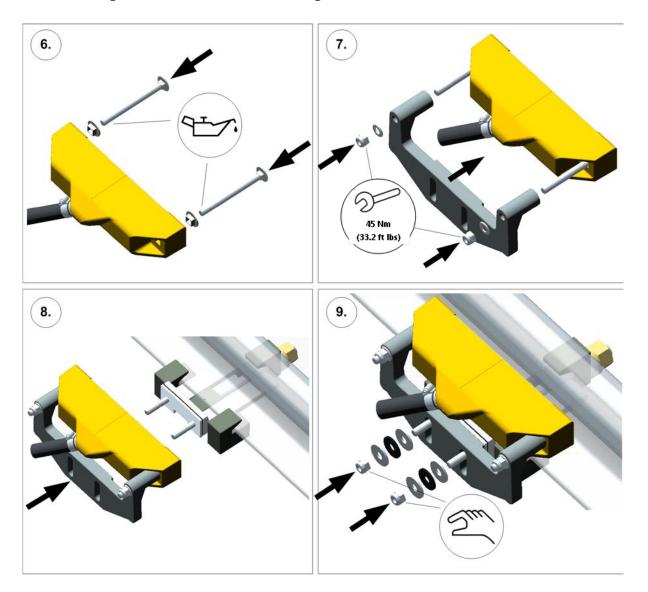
Attaching Wheel Detector to Rail Using Rail Base Mount
